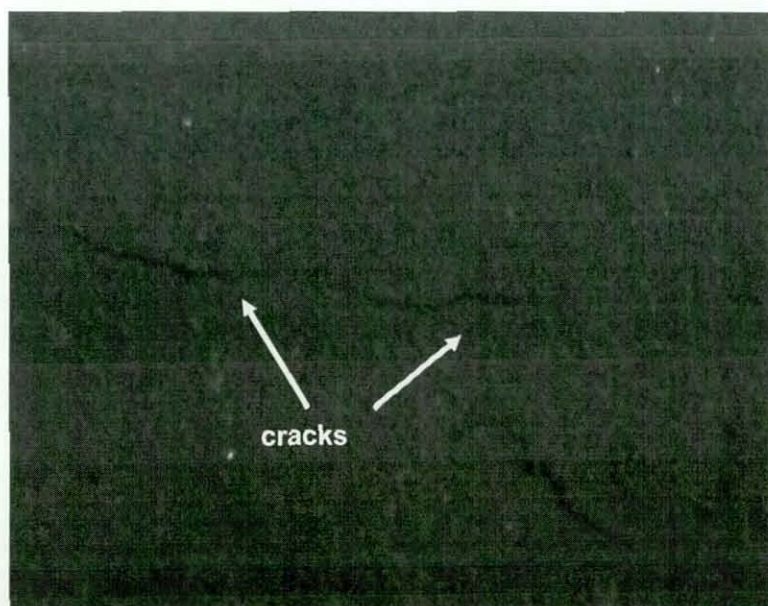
Surface appearances of RPGTR or RDGTR moulded sheets
